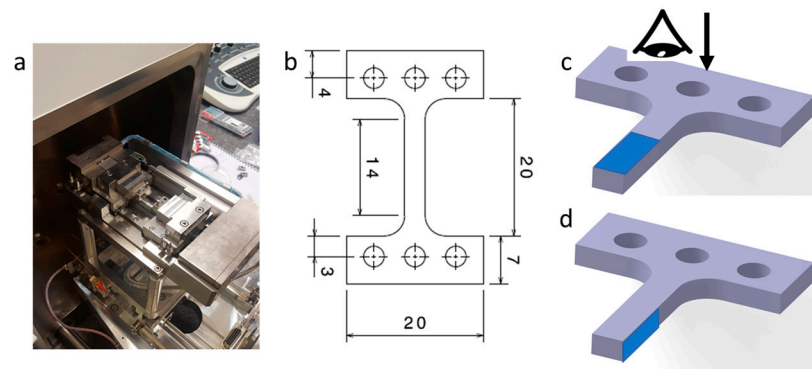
(a) Microtensile test installed on the stage of the scanning electron microscope; (b) geometry of the tensile specimens; observation of the samples, (c) front view and (d) sectional view; blue areas stand for coating. The arrow indicates the direction of observation.
